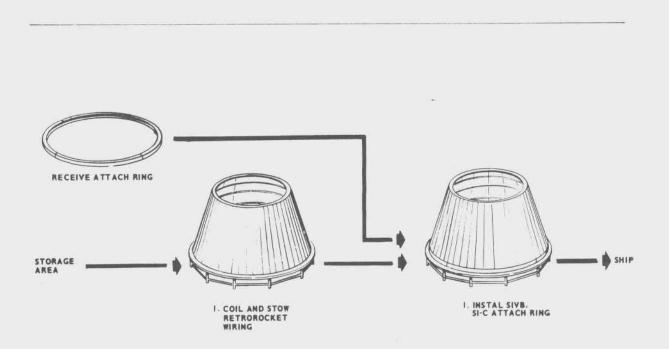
Manufacturing Plan, Retrofit INT-20/S-IVB Interstage
